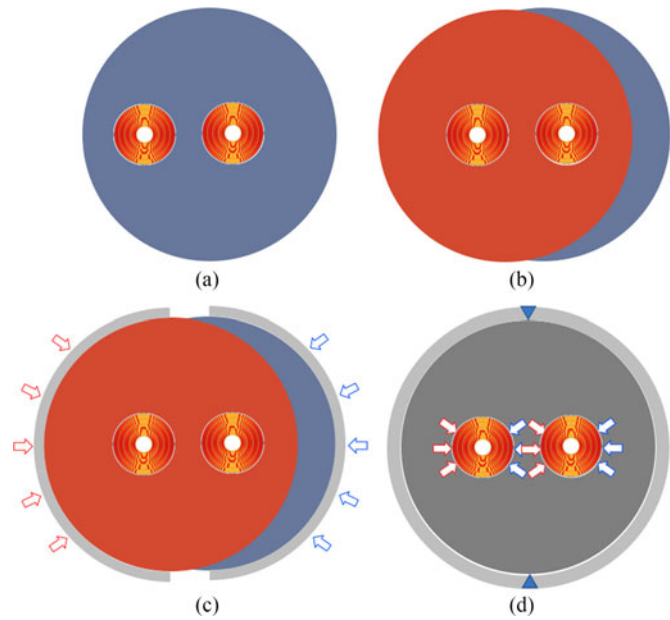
Scissors lamination schematic explanation: (a) placement of first lamination; (b) flipped second lamination; (c) with half-shells under welding press; (d) welded half shells with weld shrinkage, horizontally pre-loaded coils.
